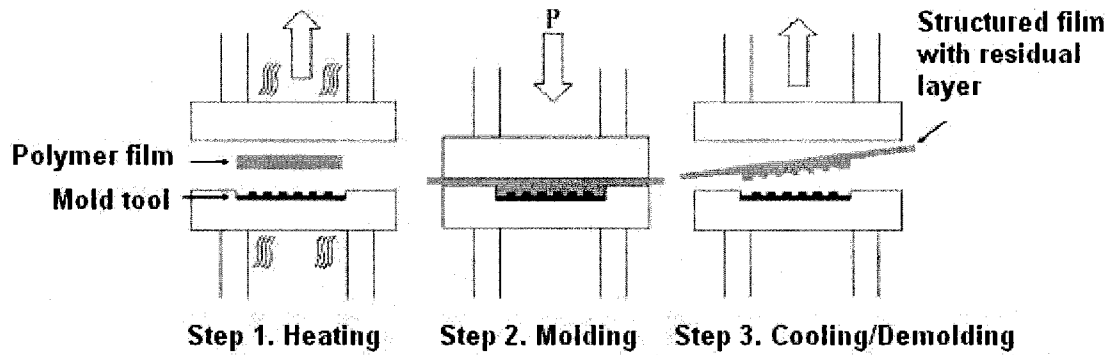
Schematic drawing of the hot embossing process flow. *Adapted from [76].
